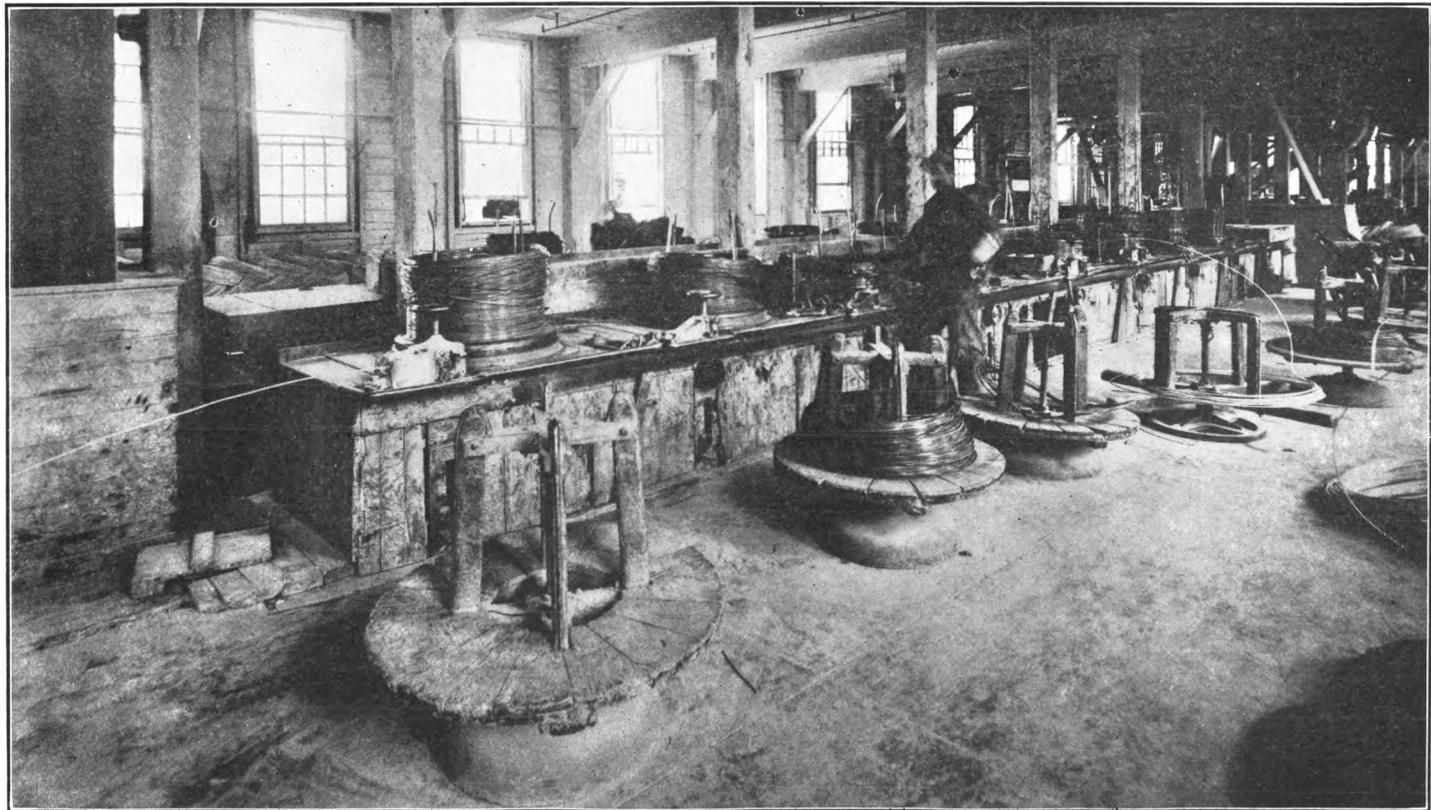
OLD STYLE WIRE-DRAWING BENCH.
